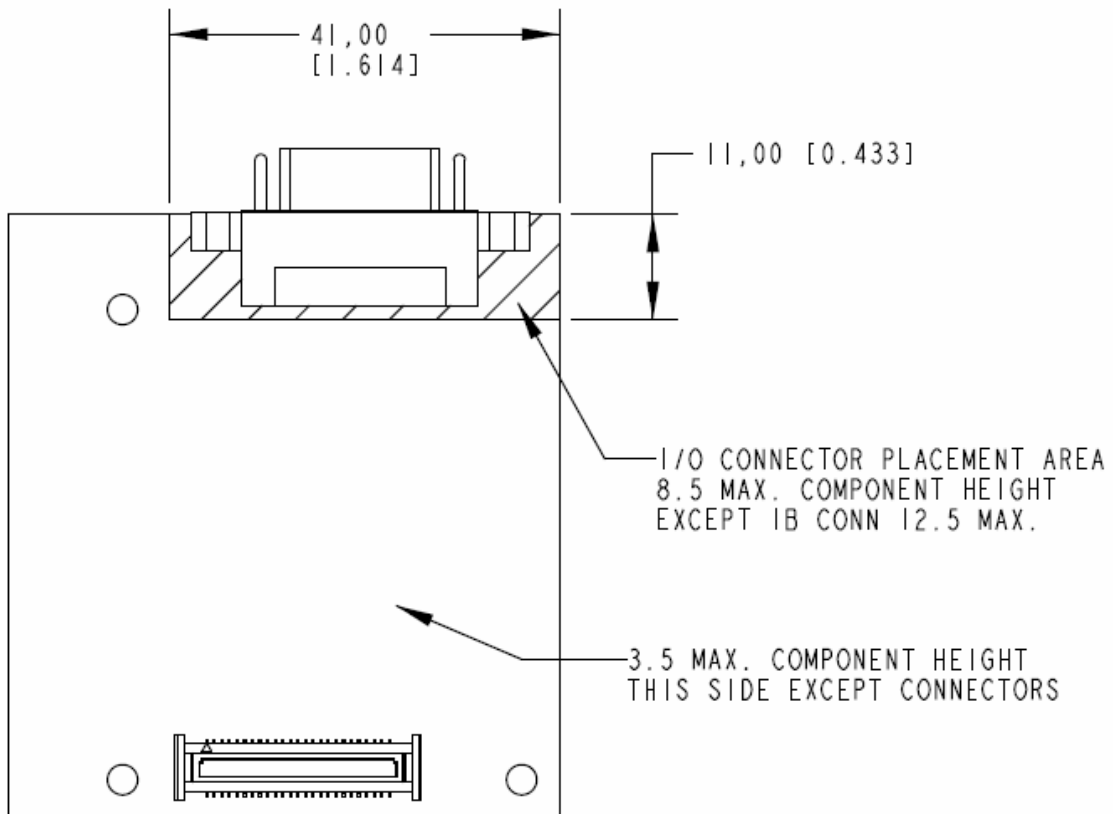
InfiniBand* I/O Module Dimensions; Bottom View
